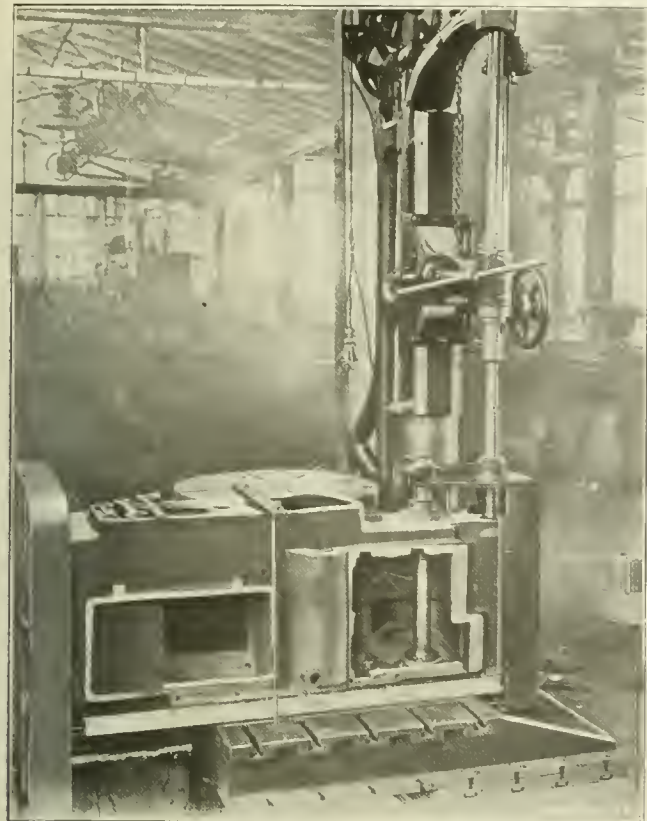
Boring the Overhang Arm Hole. Clamp Screws are snugly set before Boring
